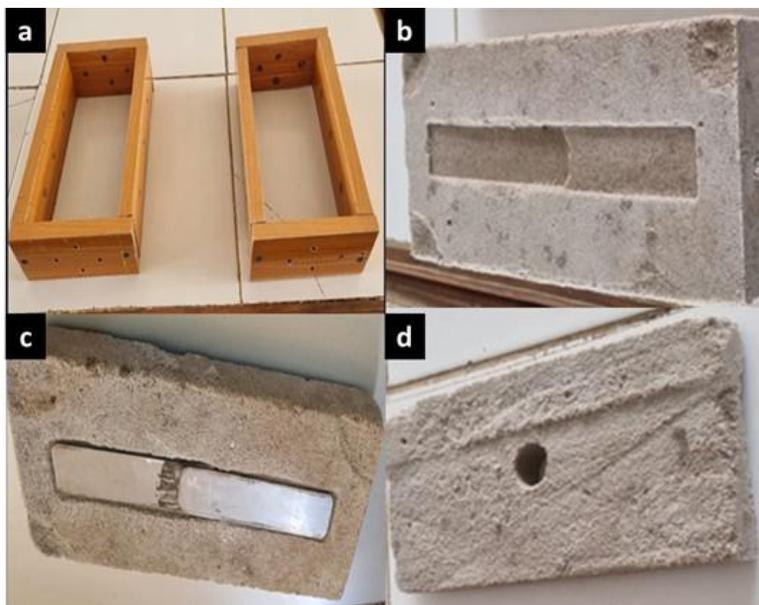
Masking refractory development (a) wooden mould frame, (b) mould's drag/bottom half with a cavity, (c) mould's drag/bottom half with lapped SS304 steel plates, (d) mould's cope/top half with susceptor-hole
